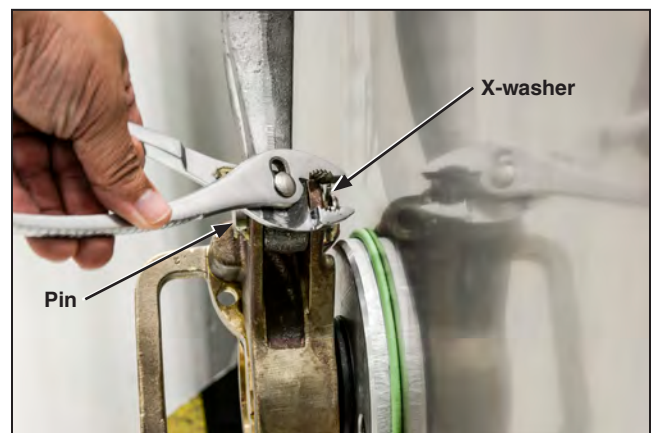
The “C”-shaped clevis on rear of operator connects the vertical operating pipe to the back of the operator using a 5/8-inch steel pin and X-washer.
